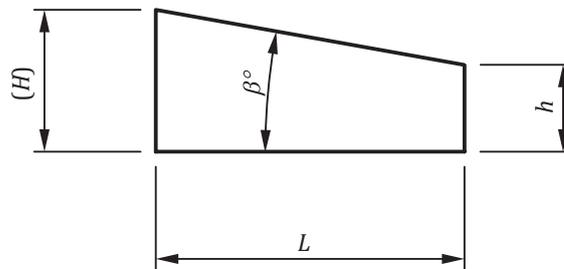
Dimensioning of wedge; one height of wedge and wedge angle specified
